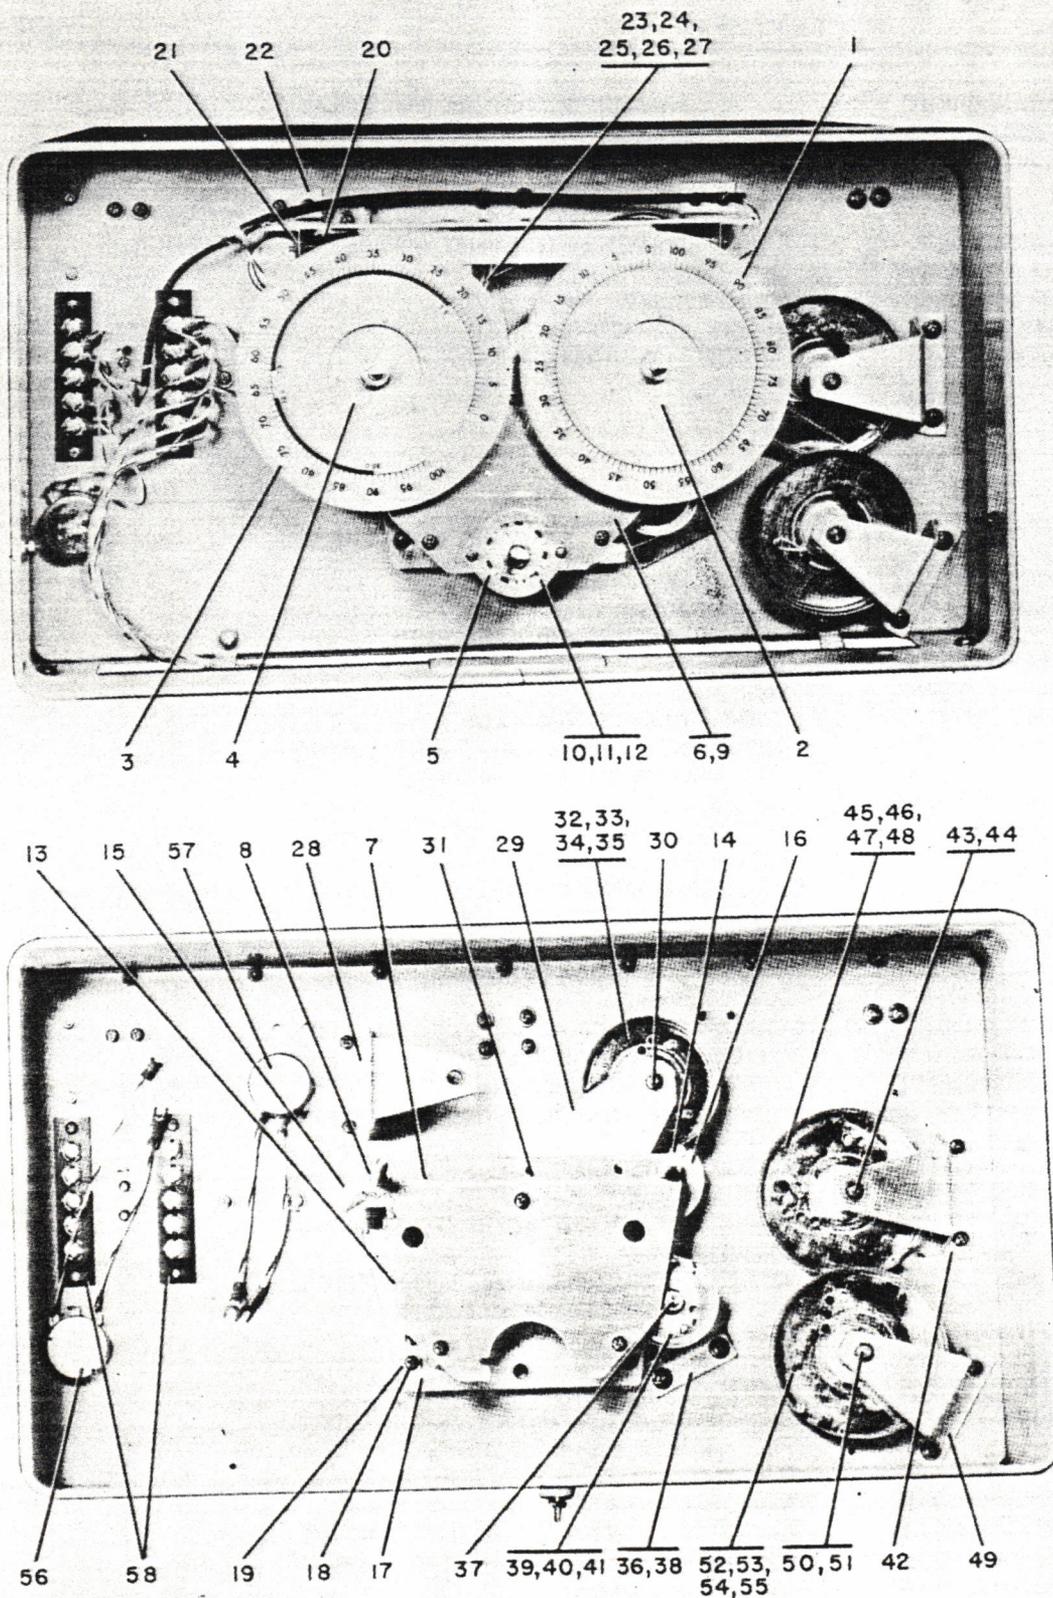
Cabinet Assembly (Sheet 1 of 3)
